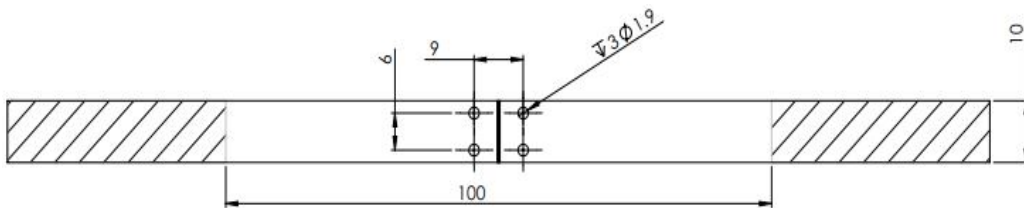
Schematic drawing (out-of-scale) showing the dimensions of the SENT test specimen.
